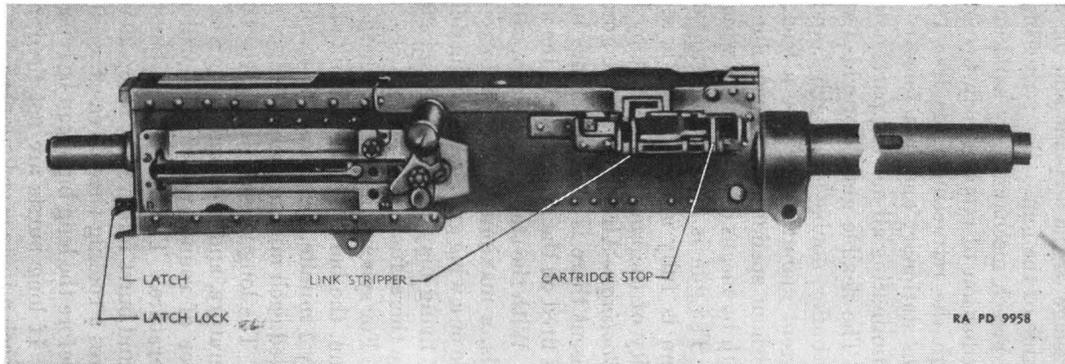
Browning machine gun, caliber .50, M2, aircraft, flexible—right side view.
